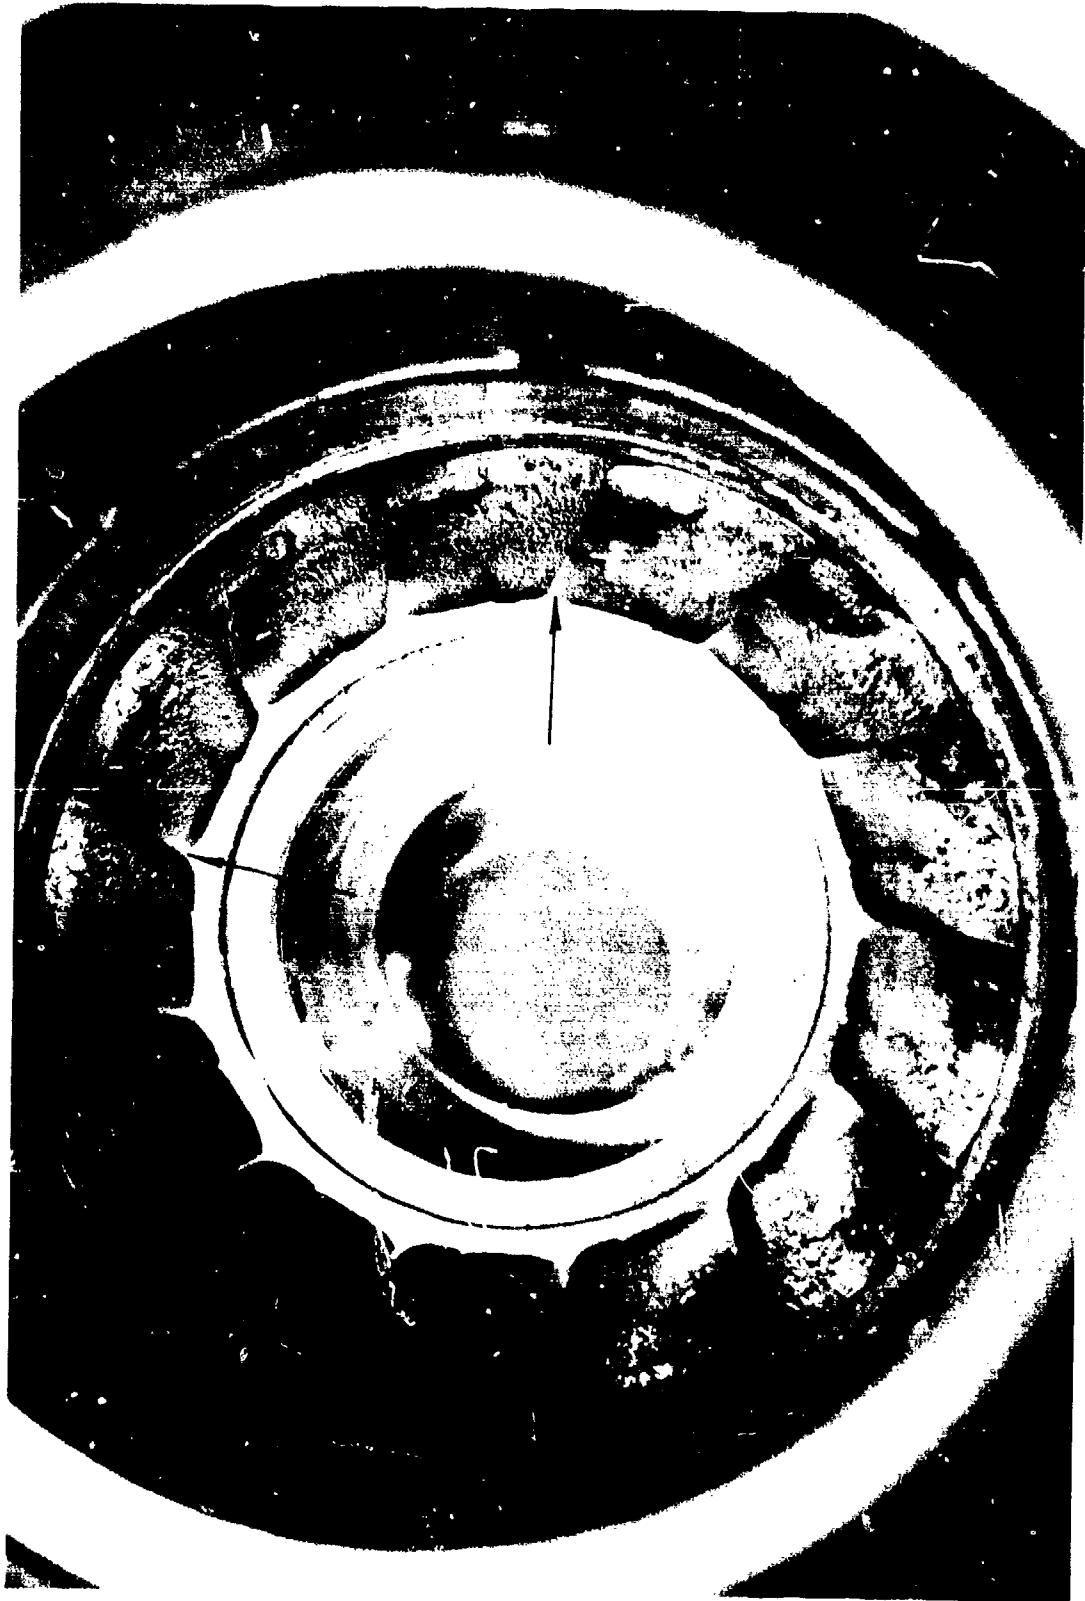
Hoist Drive S/N 2 Reversing Turbine Nozzle.
